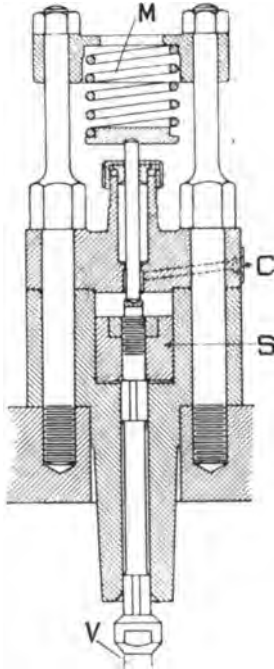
Relay Cylinder for Actuating Valve of Curtis Turbine.
